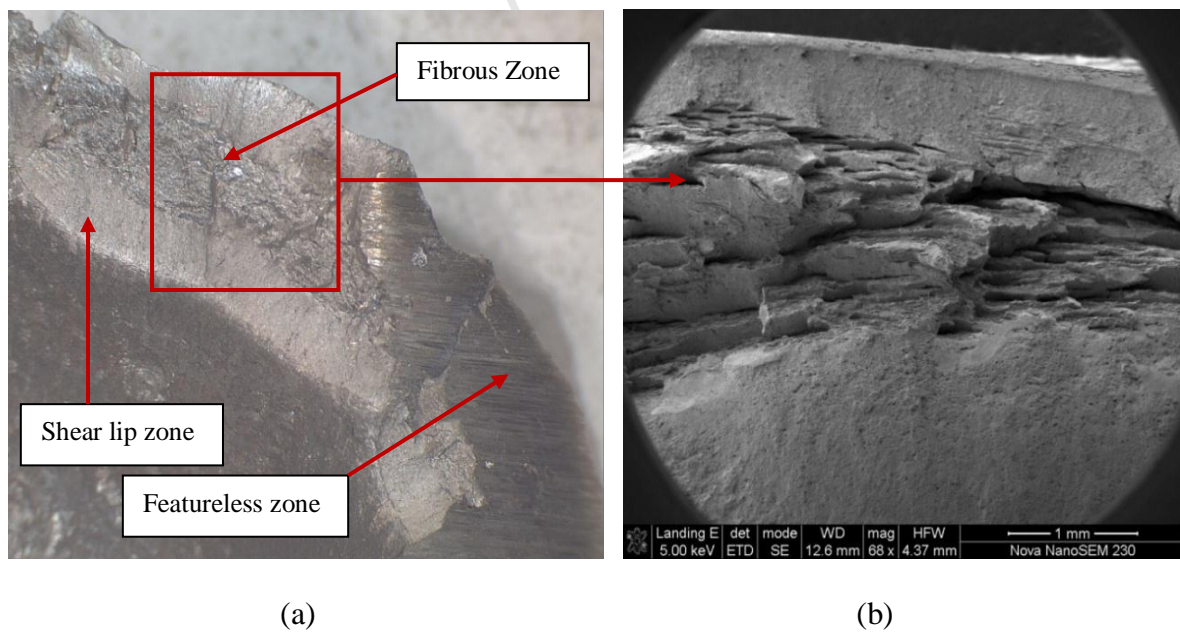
Photographs to show the fractured surface zones of 6 mm thick single plates (m=62g, I=108 Ns)
